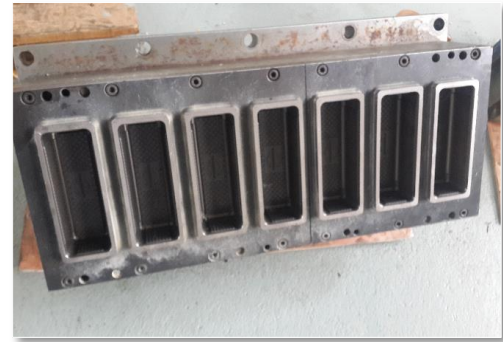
Plastic thermoforming mould for biscuits skillets
